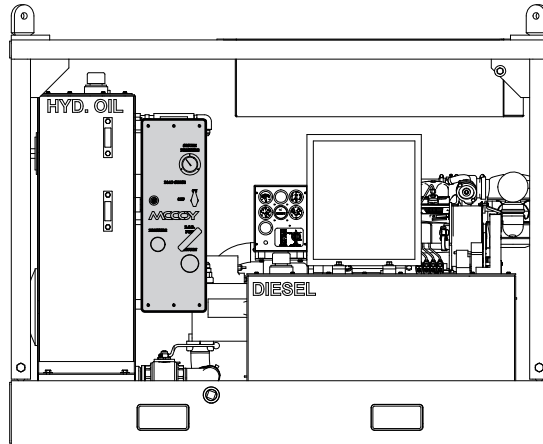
Hydraulic Bulkhead Panel Location
